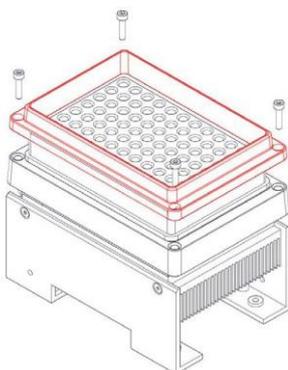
Assemble PCR Adapter with mounting frame (to enclose the PCR Adapter) and 4 screws and tighten the four screws at the corner finger tight (respectively with 0,25Nm).
